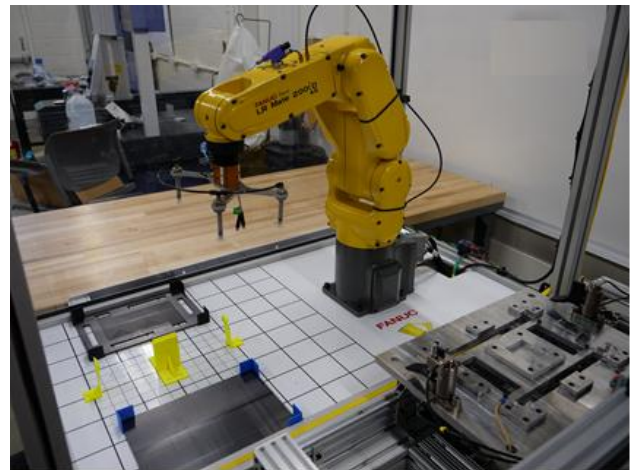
Robot work volume showing the fixture where the finished graphite plates are stacked (far left); fixture for flipping over the plates (middle left); fixture where the blank plates are stacked (close left); fixture on the CNC router containing two AMWSW16 pneumatic swing clamps (right).
